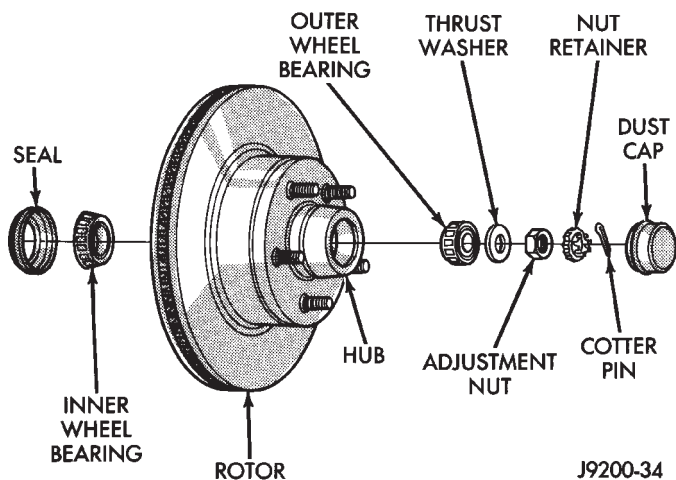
2WD Front Wheel Bearings—XJ Vehicles
